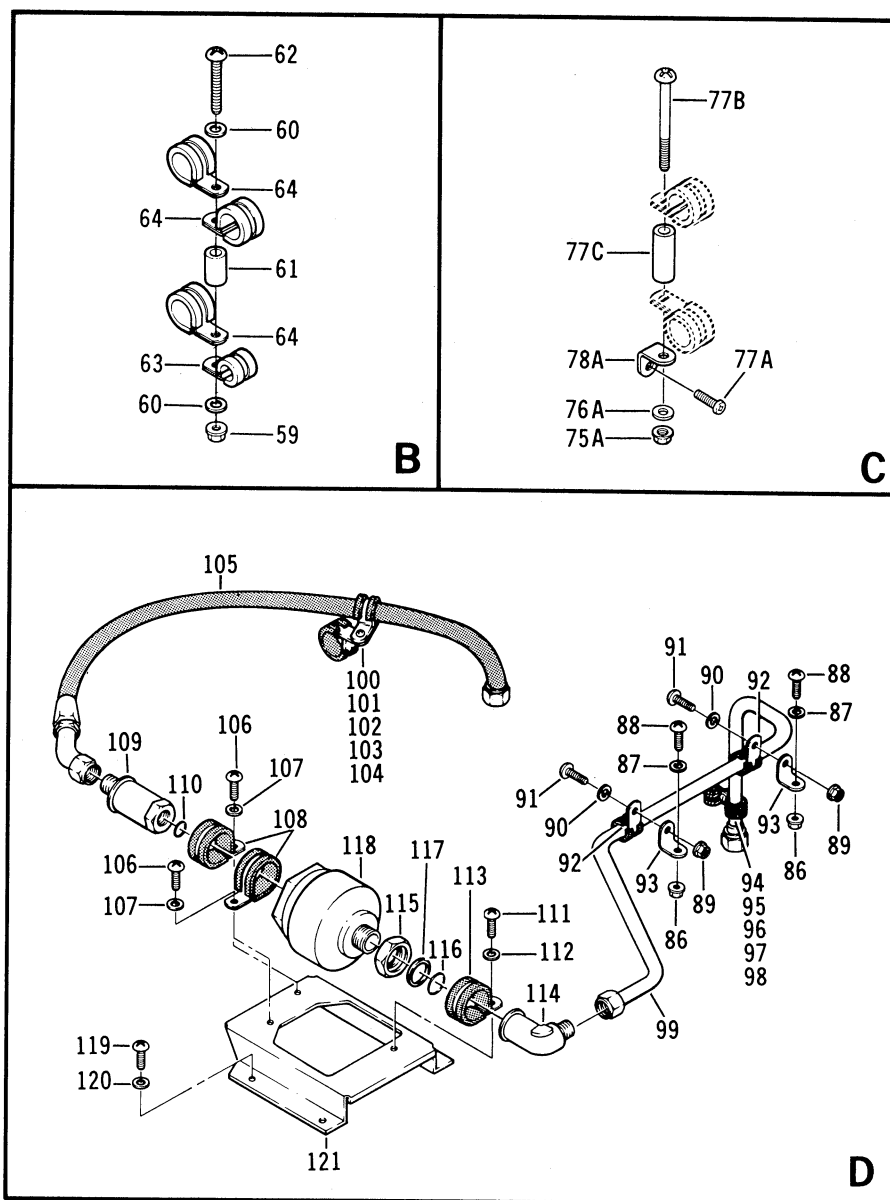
Hydraulic system 2 installation (Sheet 2)
